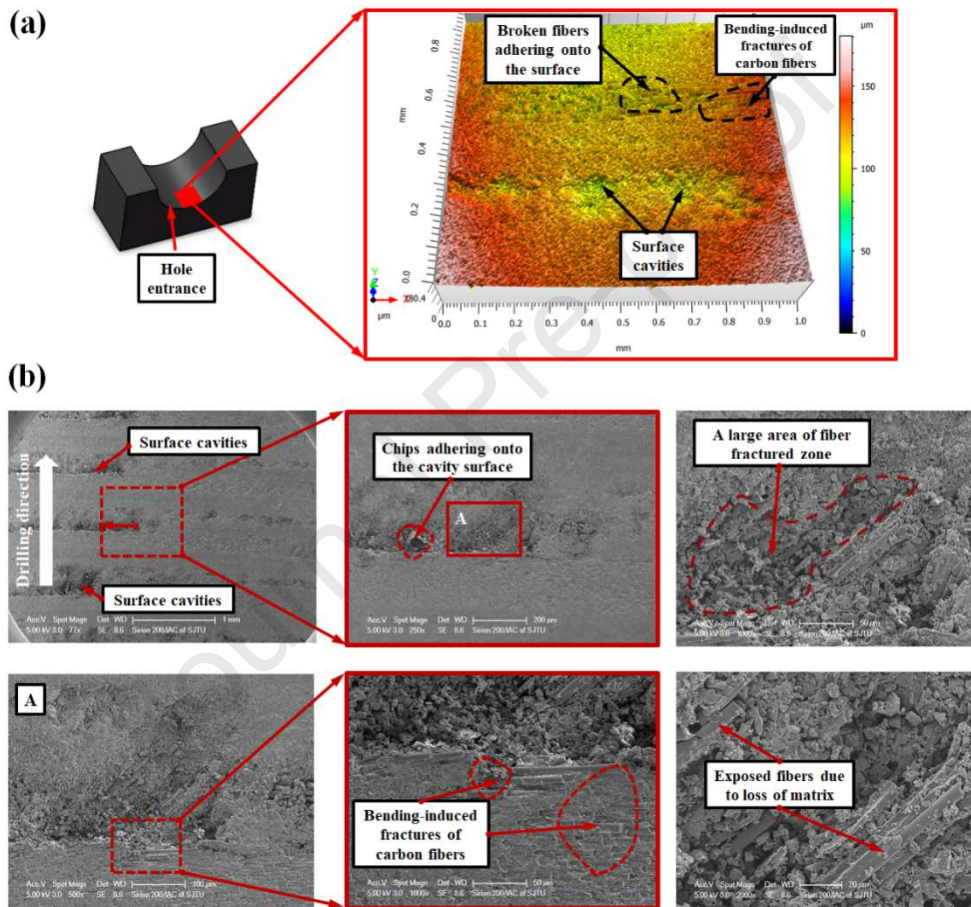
(a) CLSM and (b) SEM morphologies of the 15th composite hole machined by the candlestick drill.
